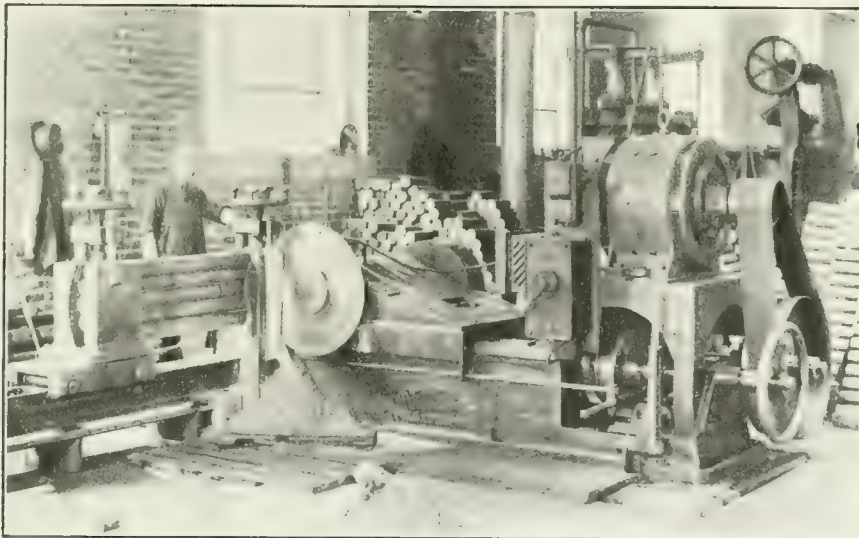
"ESPEN-LUCAS" COLD SAW CUTTING-OFF BILLETS FOR 33 H E SHELLS.
